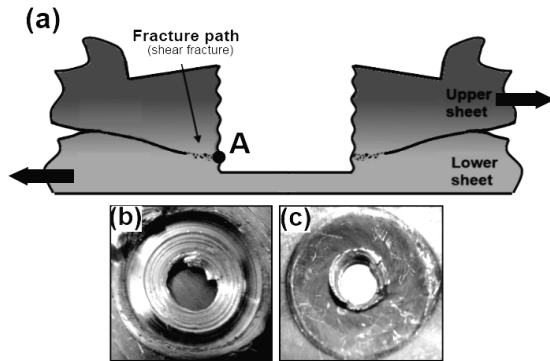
(a) Schematic of the crack propagation path under tensile shear loading in shear fracture mode and also the top view of sheets after final fracture in (b) upper sheet; (c) lower sheet at 630 rpm rotational speed and 0.3 mm shoulder penetration depth. The arrows indicate the loading direction.
